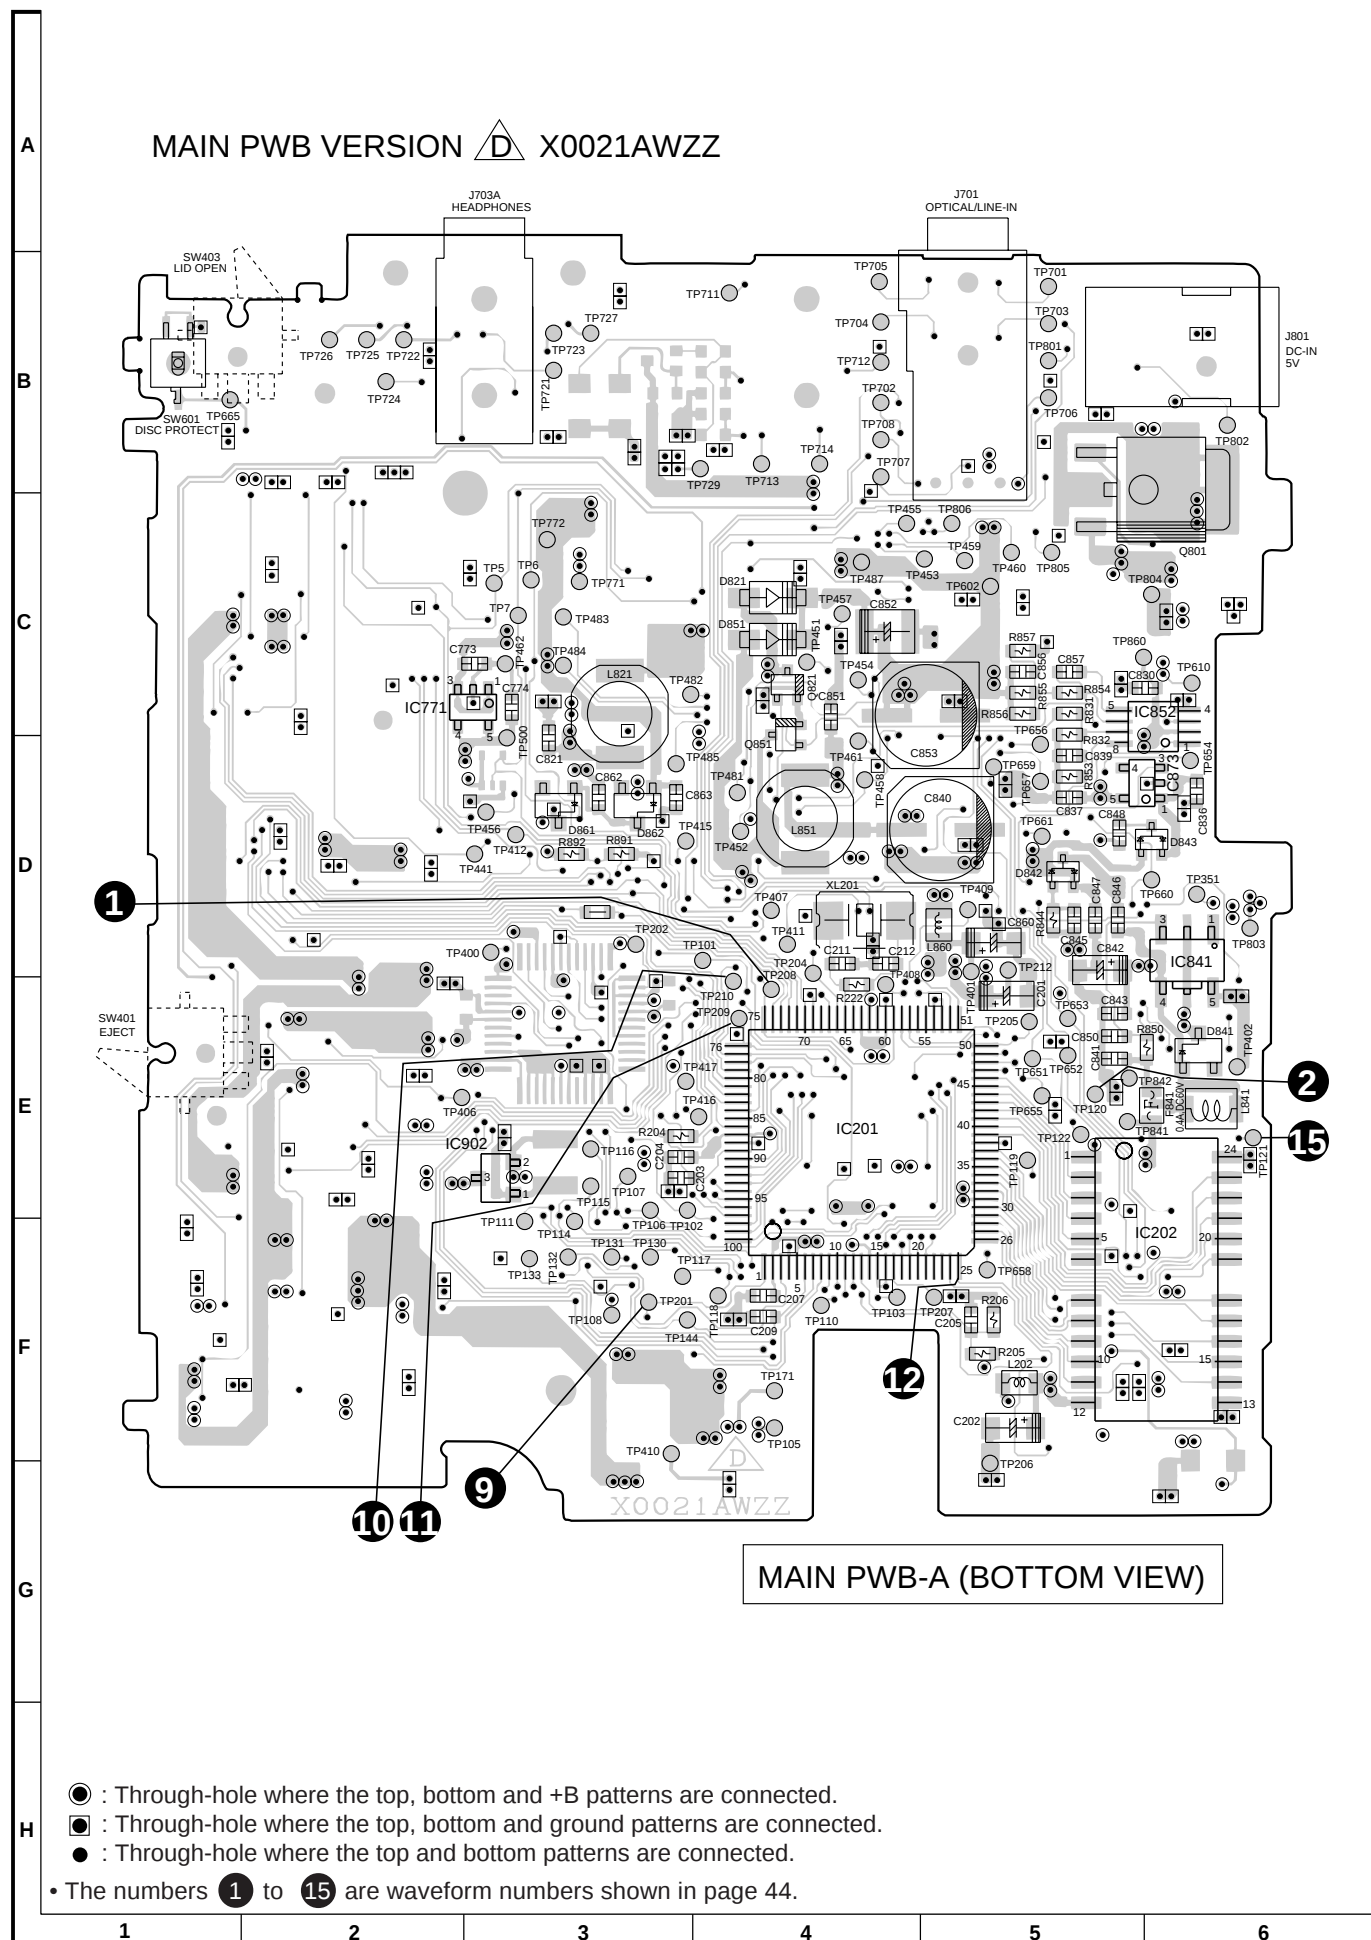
WIRING SIDE OF P.W.BOARD (9/11)
